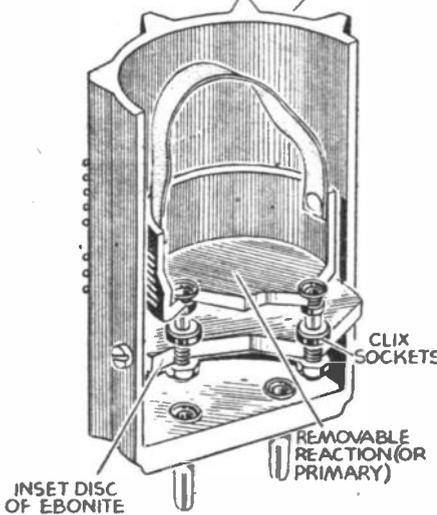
Suggestion for making one section of a S.W. coil on a removable former for experimental purposes.
